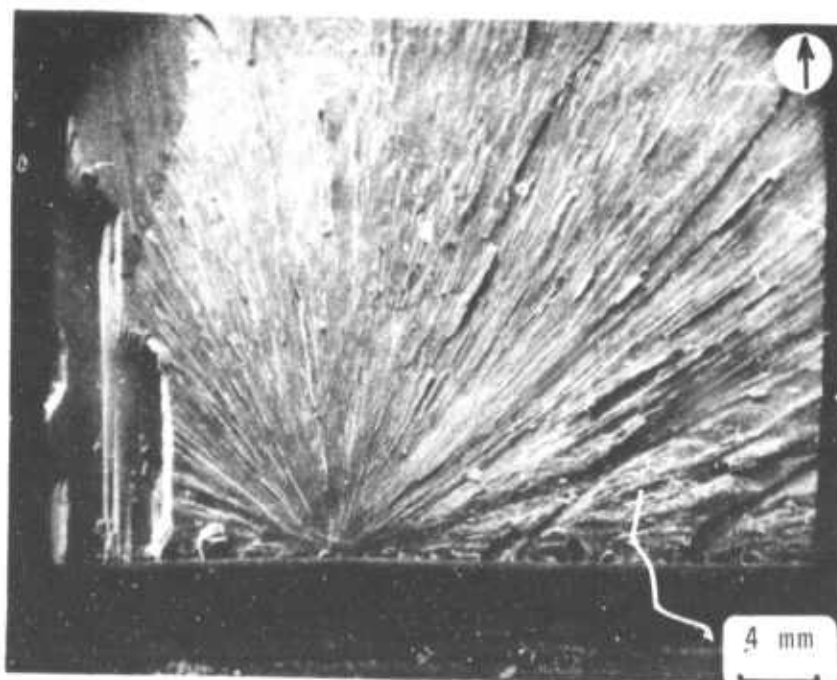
Fatigue Fracture Surface Near Origin
